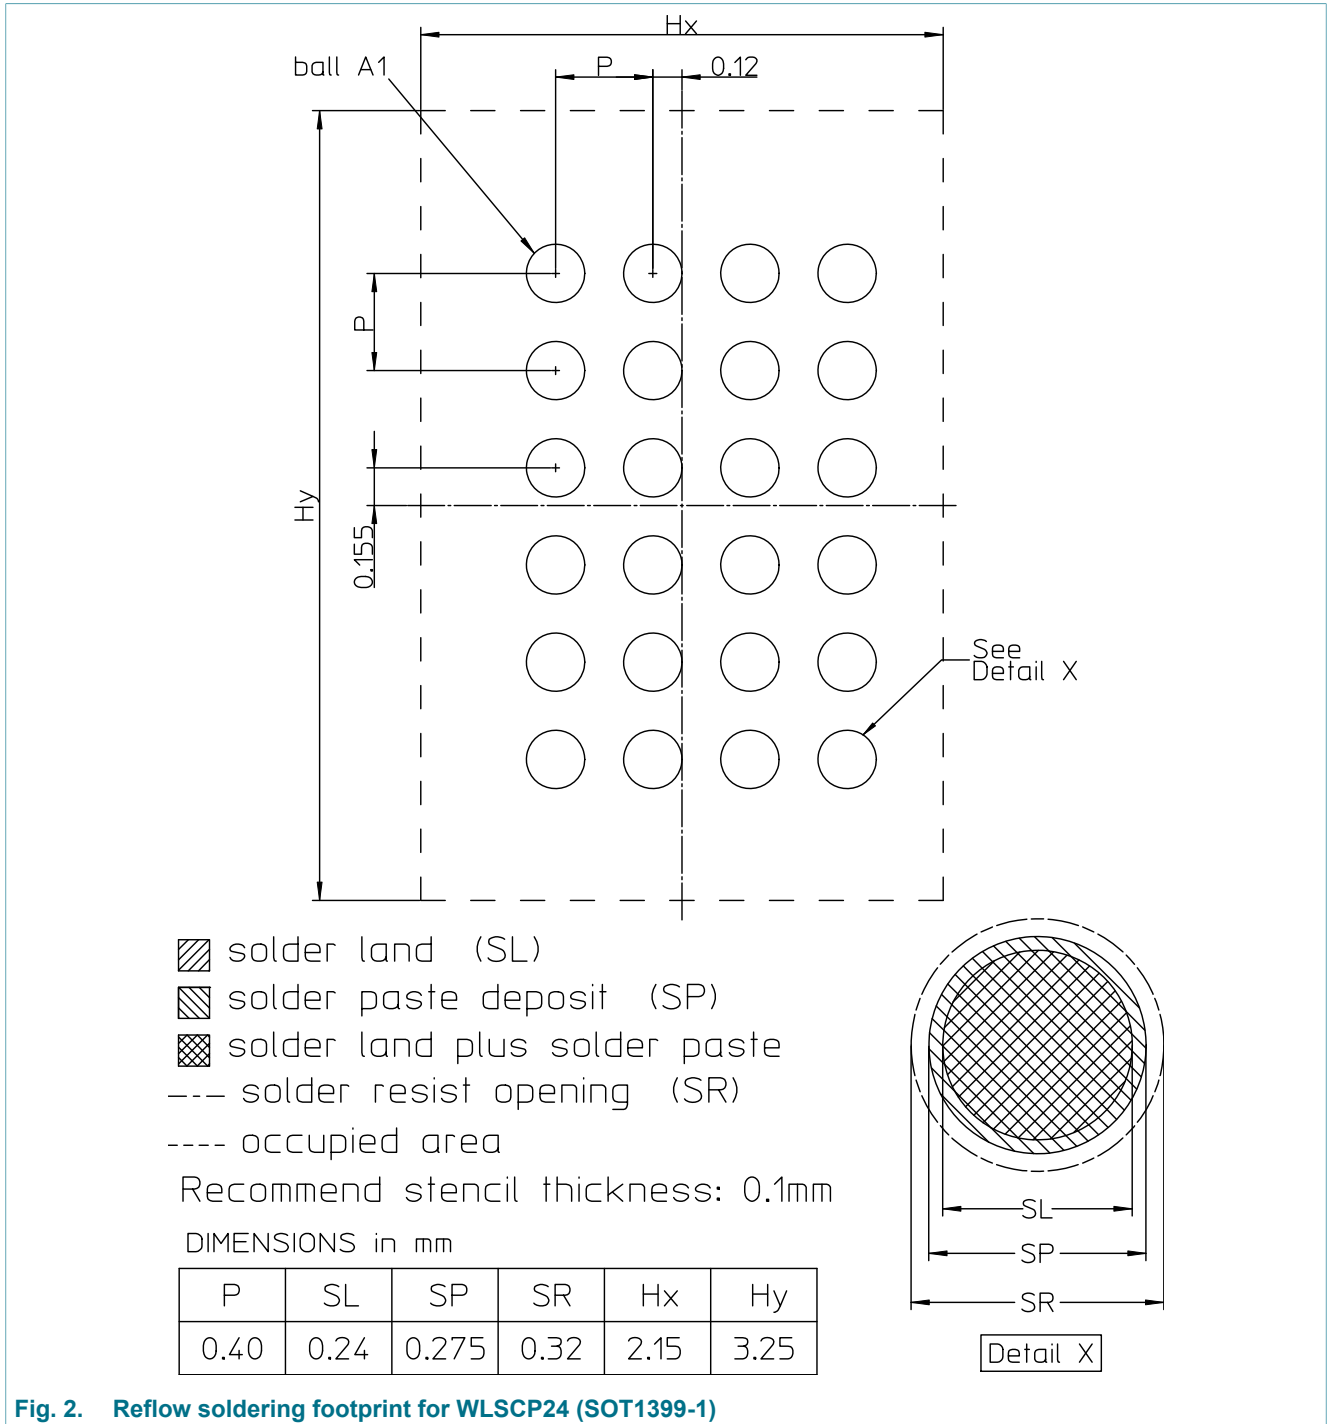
Reflow soldering footprint for WLCSP24 (SOT1399-1)
